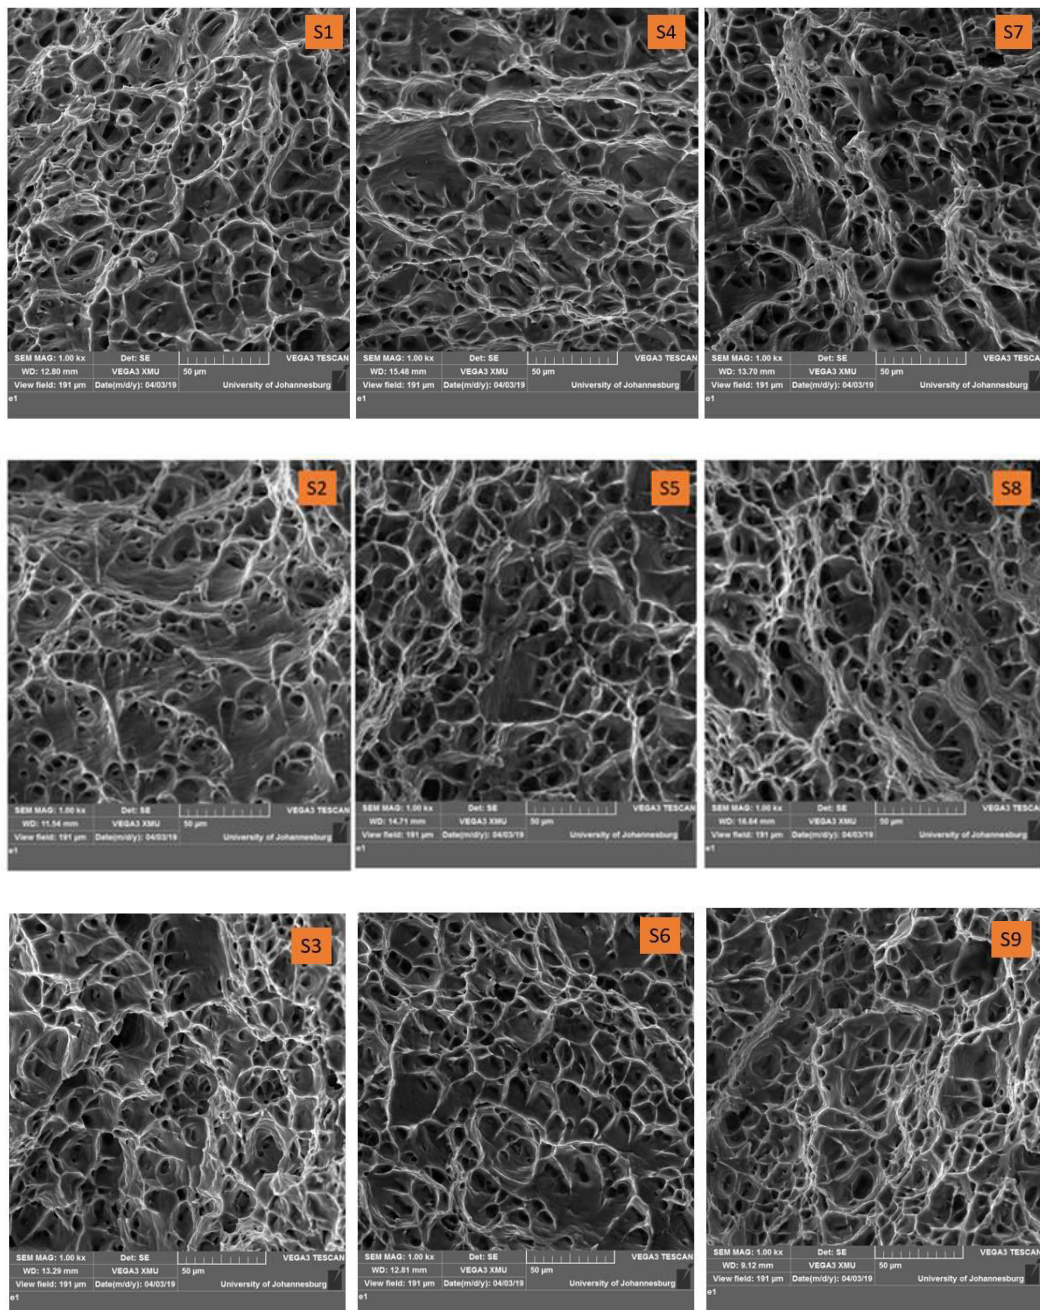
SEM image of the fracture surfaces of the produced spot welds samples.
